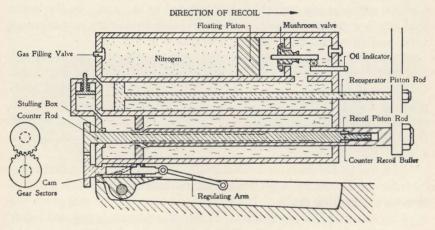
Schematic Drawing of Recoil and Recuperator Mechanism, 155-mm. Gun Carriage, Model 1918.
